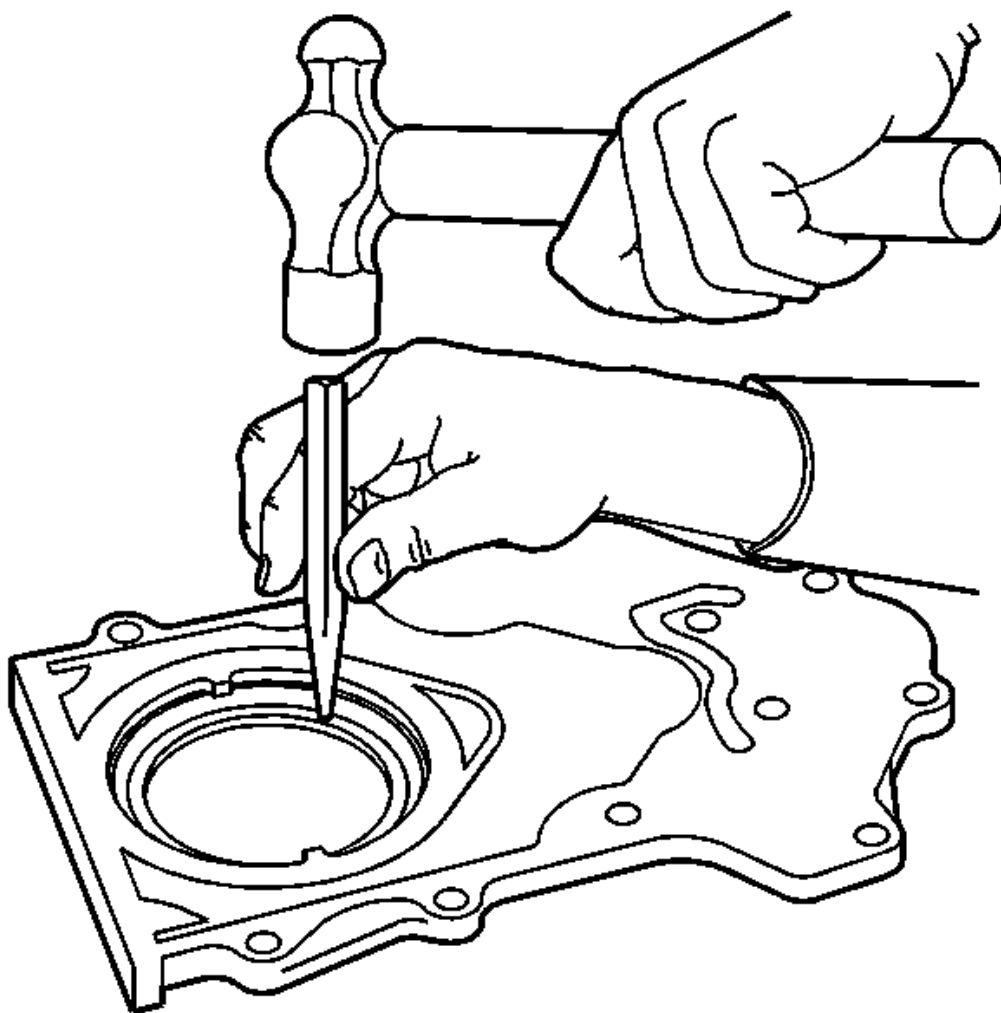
Removing Crankshaft Rear Oil Seal From Housing
